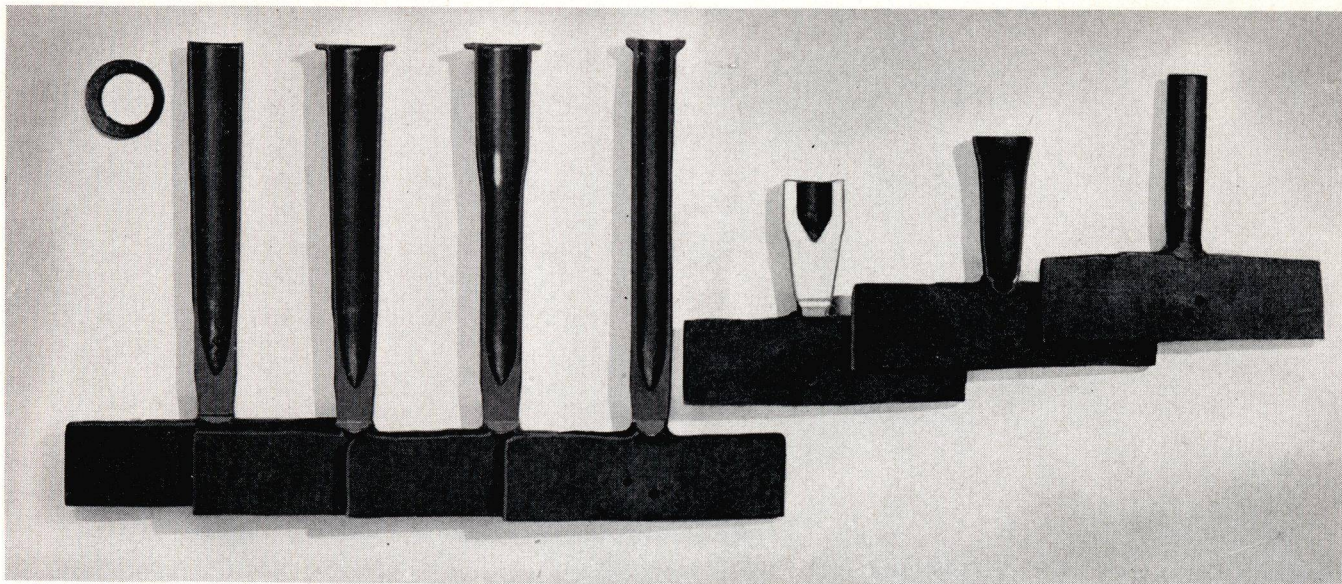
Forging the socket on a solid shank shovel by "push extrusion".
